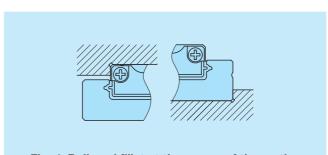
Relieved fillet at the corner of the mating reference mounting surfaces
